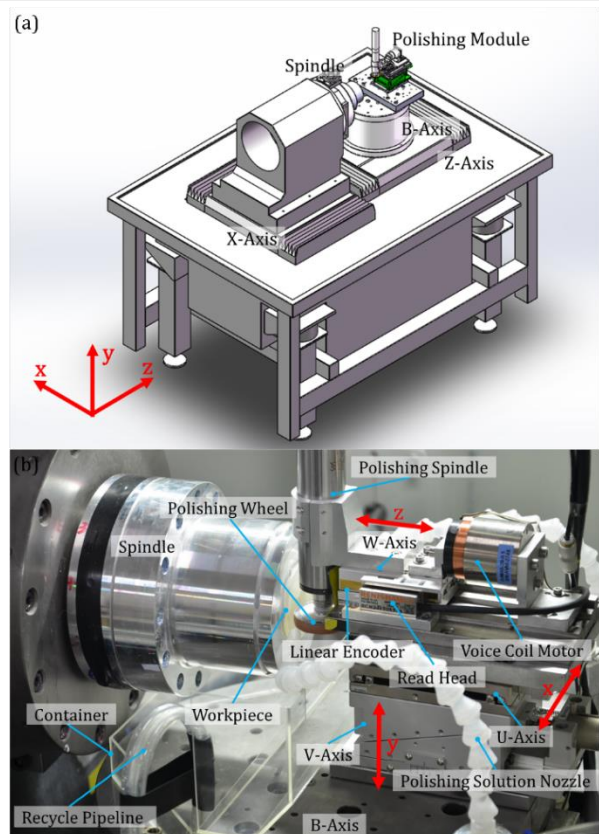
Machine tool configuration for polishing (a) 4-axis homemade grinding machine tool configuration. (b) Polishing module.
